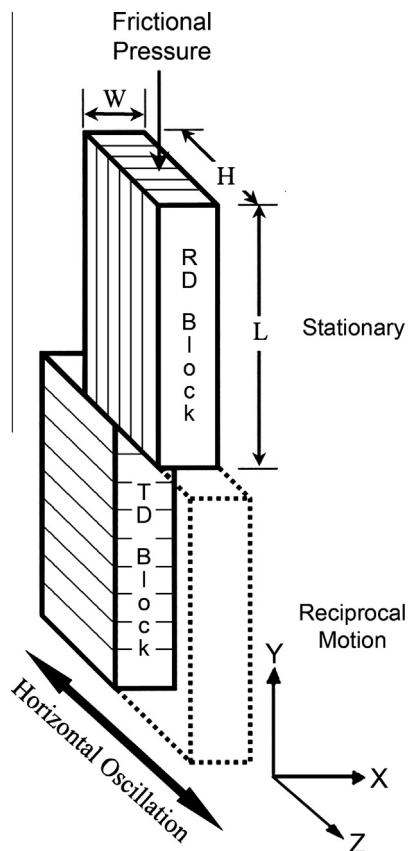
A schematic side view of the workpiece showing the linear friction welding process on two Ti–6Al–4V blocks. The lines demarcated on the two weld blocks (RD and TD) present the rolling direction of the as-received Ti–6Al–4V rolled plate.
